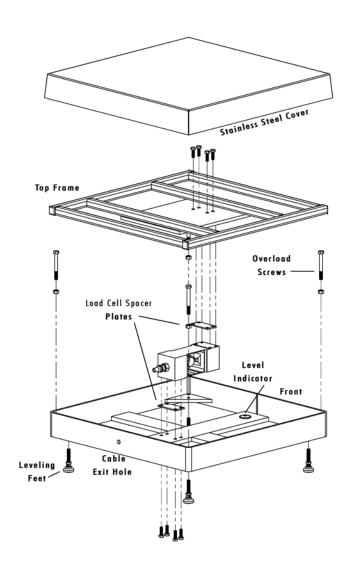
EXPLODED VIEW OF 24" X 24" SCALE SHOWING SELECTED PARTS
